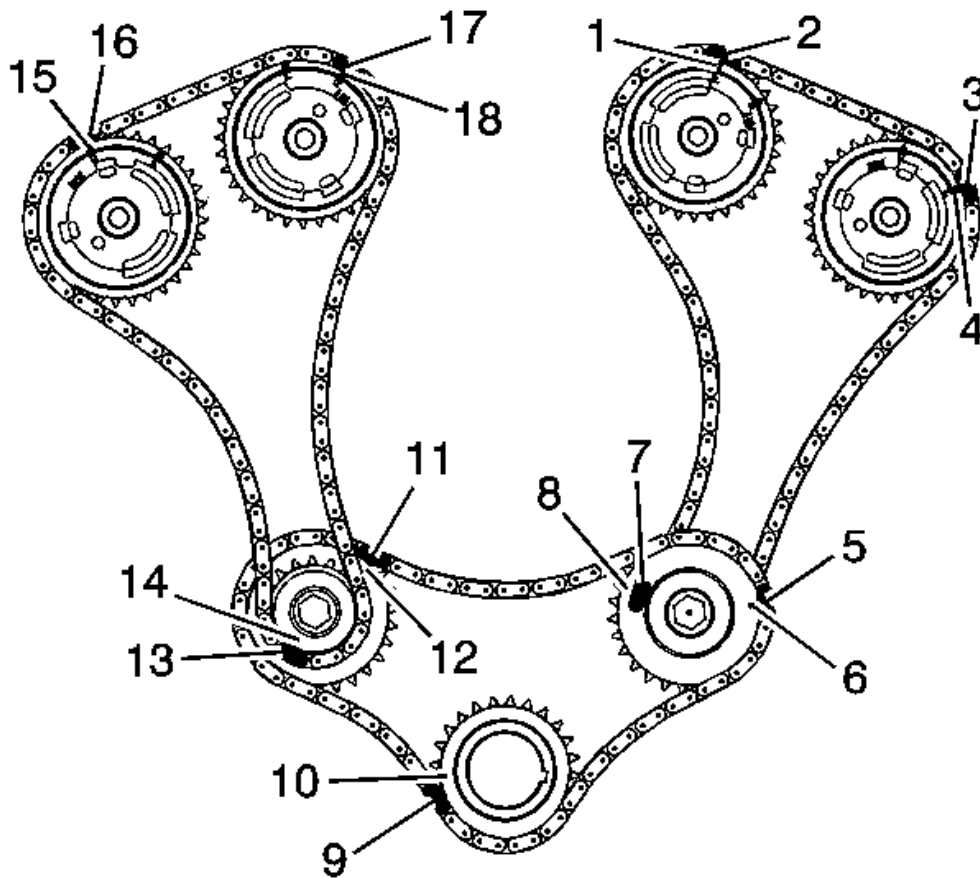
Identifying Timing Chain Marks And Their Respective Locations On Gears, Sprockets And Actuators
